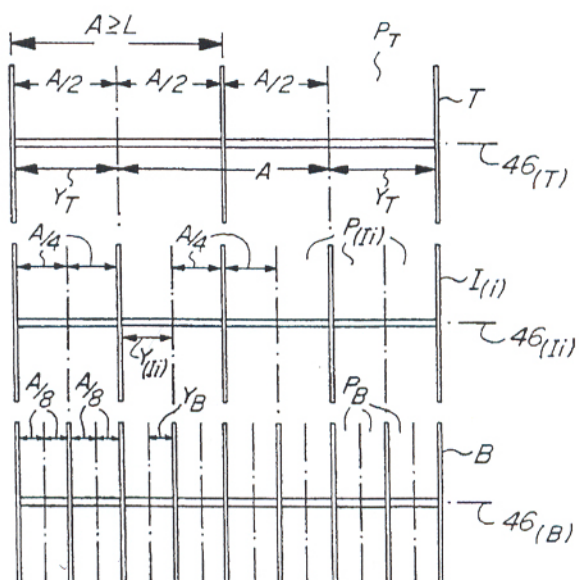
Top of flake alignment machine, showing alignment plates.
